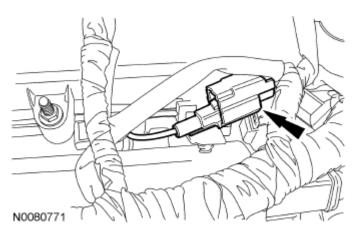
Locating Radio Capacitor Electrical Connector Courtesy of FORD MOTOR CO.
